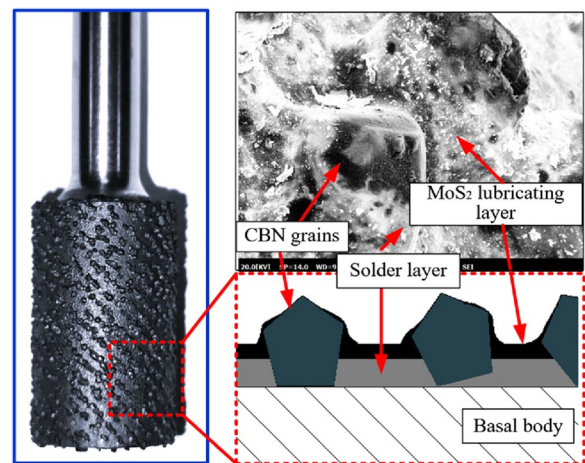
Single layer brazed CBN grinding wheel with MoS_2 coated
